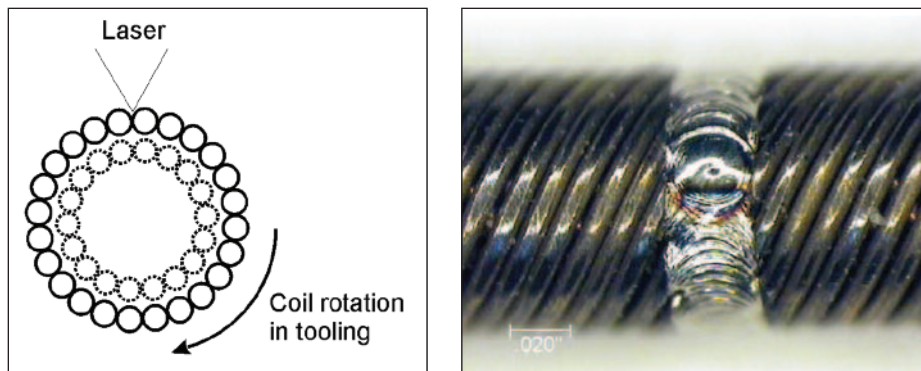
A cross sectional schematic of the weld geometry of the two coils, and a view of the circumferential lap weld.
